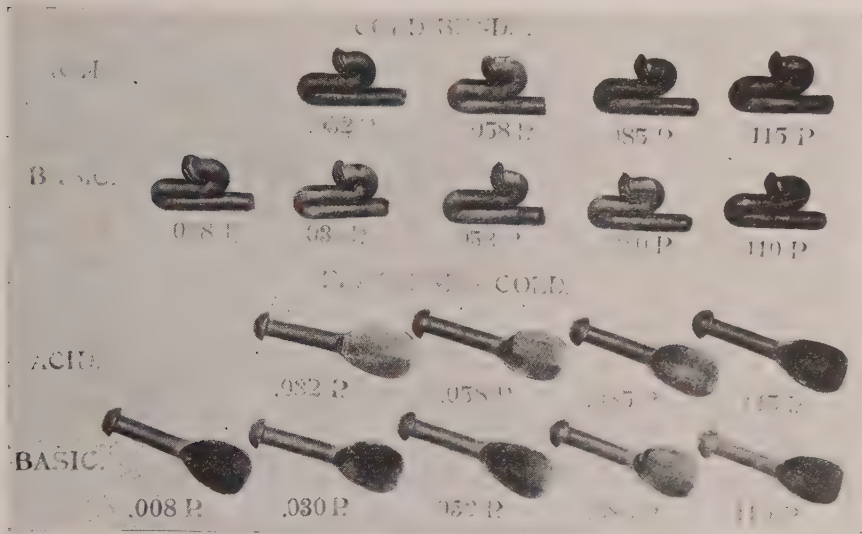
Cold Bends and Flattening Tests—One-inch Rivets
